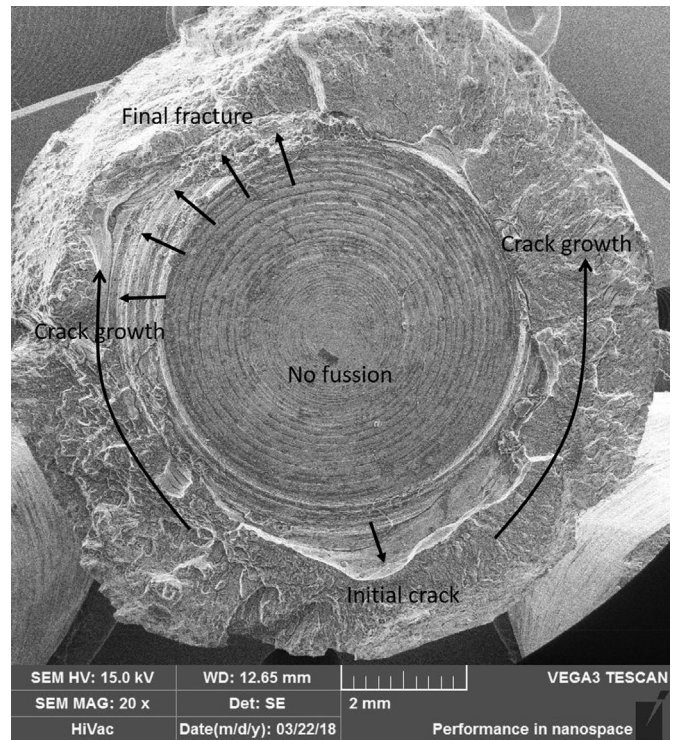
Fracture surface of fatigue test for underwater weld in depth of 10 m.
